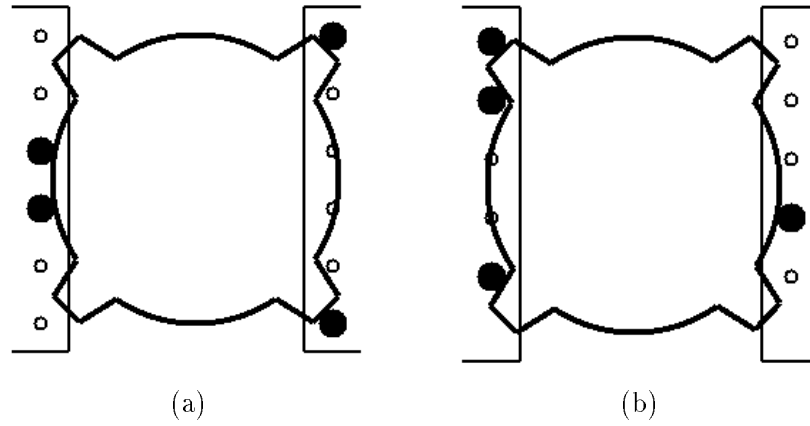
(a) a Type I fixture for large4Handle, a large four sided handle (b) a Type II fixture for large4Handle
